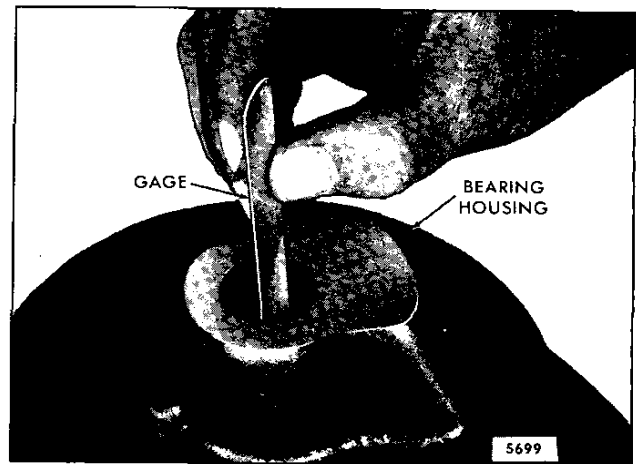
Checking Turbine Seal Ring Gap in Bearing Housing
